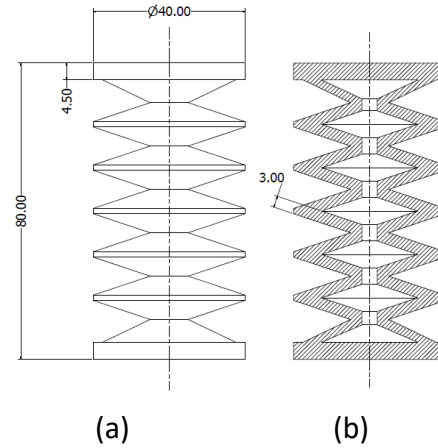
(a) pressure actuator dimensions, (b) cross section of the actuator, dimensions are in mm
